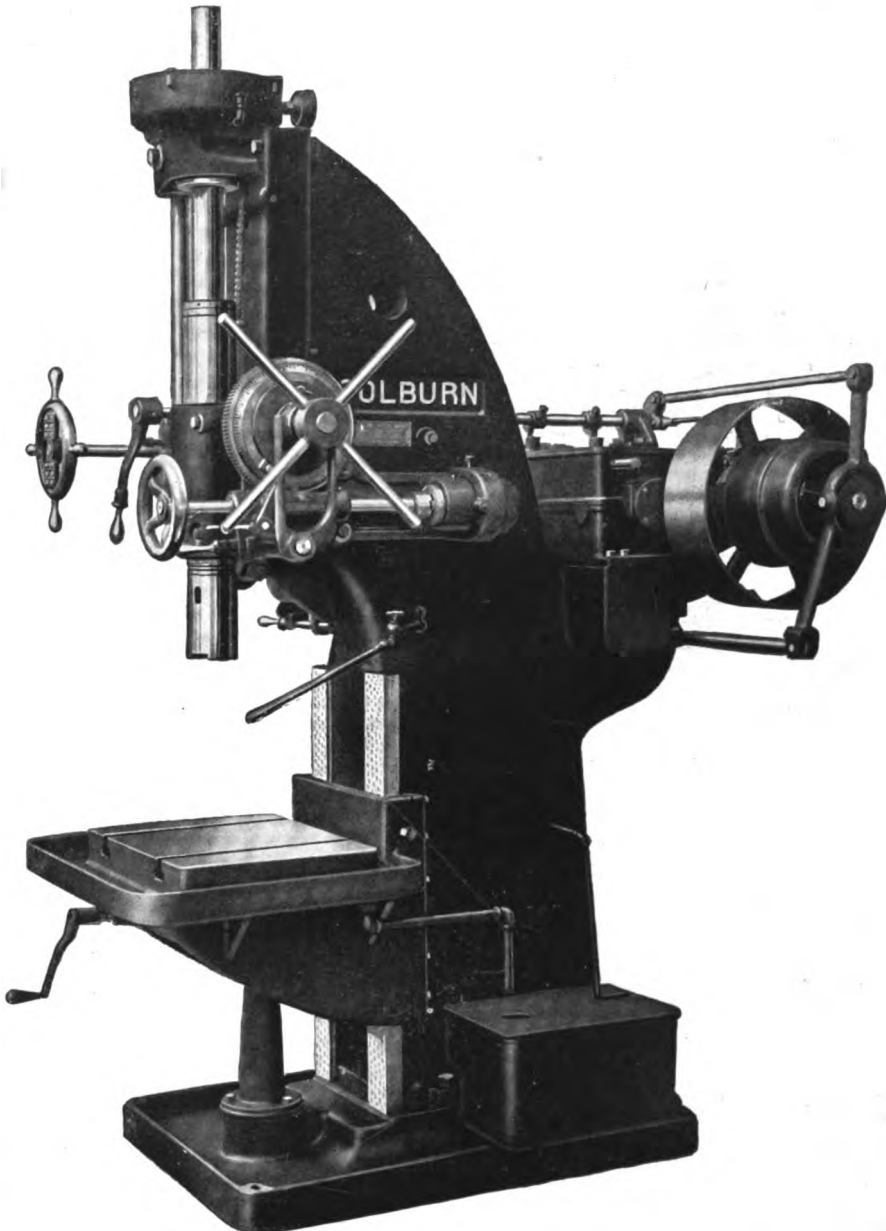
D4 HEAVY DUTY DRILL PRESS, WHICH IS TYPICAL OF THE "D" LINE OF DRILLS, THE OTHERS DIFFERING ONLY IN SIZE AND CAPACITY. THIS MACHINE HAS 24 in. (610 mm.) SWING. ALSO FURNISHED WITH COMPOUND TABLE, TAPPING ATTACHMENT, TAPPING HOOD AND MOTOR DRIVE, IF DESIRED
